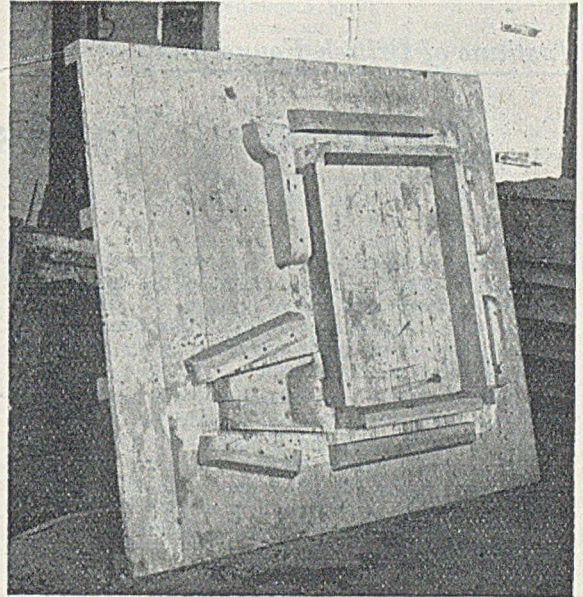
RAMMING BOARD FOR THE FRET-CUTTING MACHINE BASE PATTERN.
